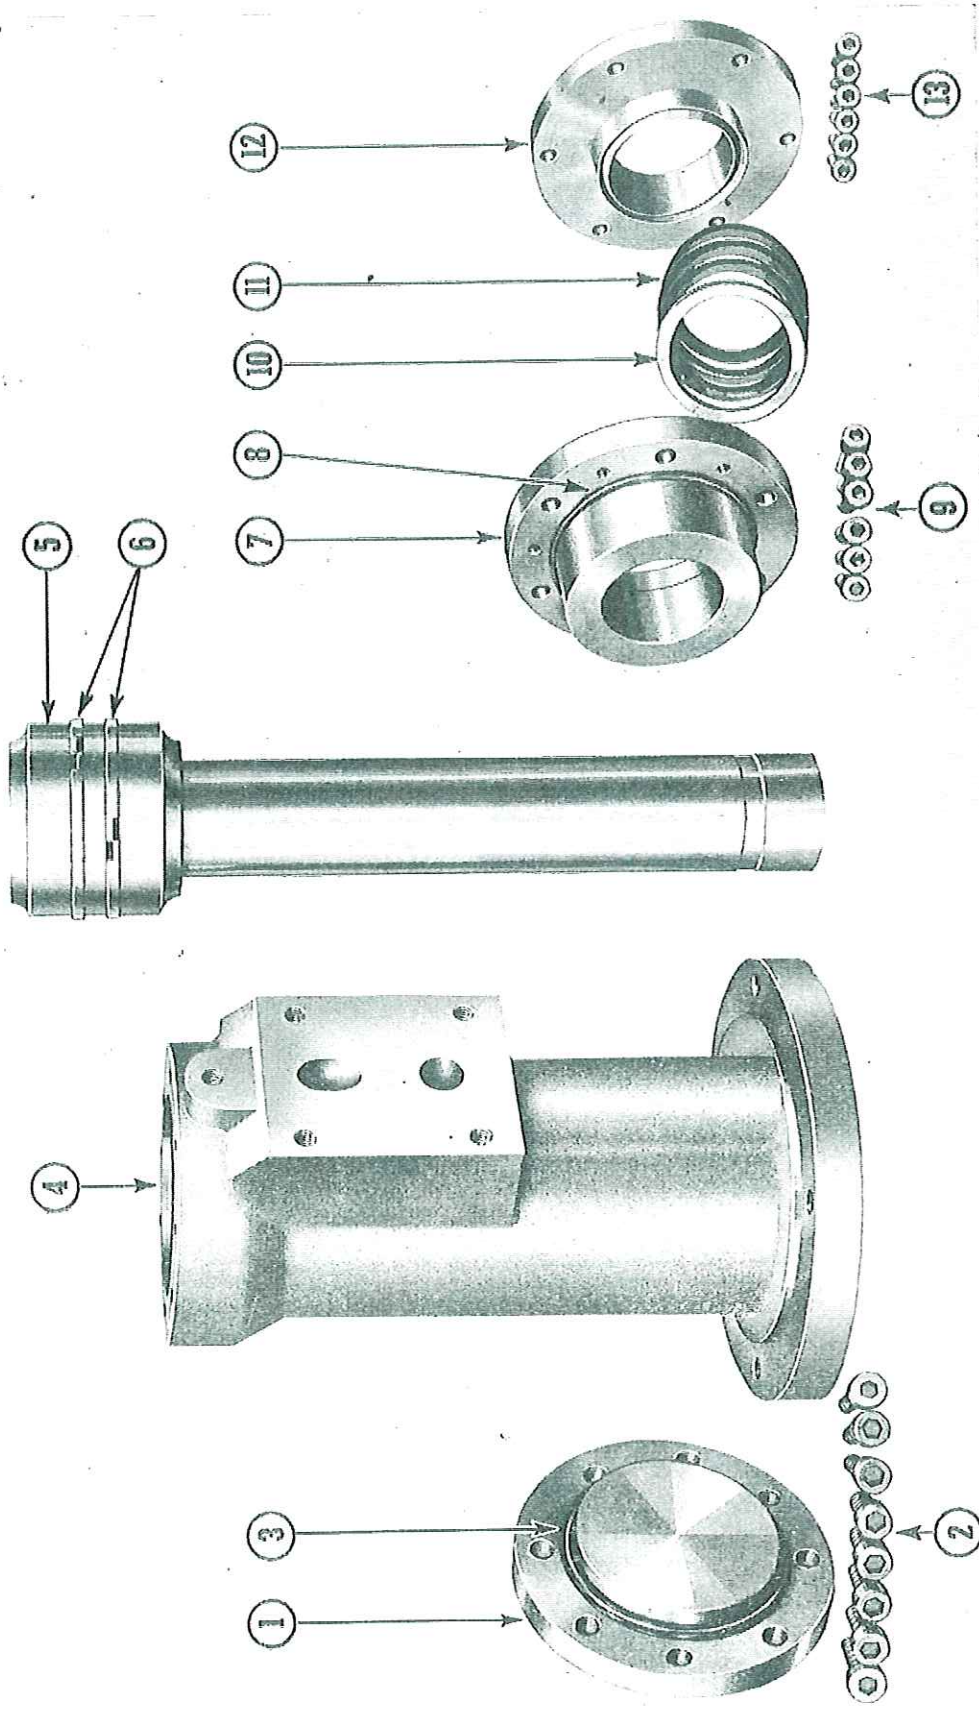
Cylinder, Piston and Ram Assembly (4- and 6-ton models).
